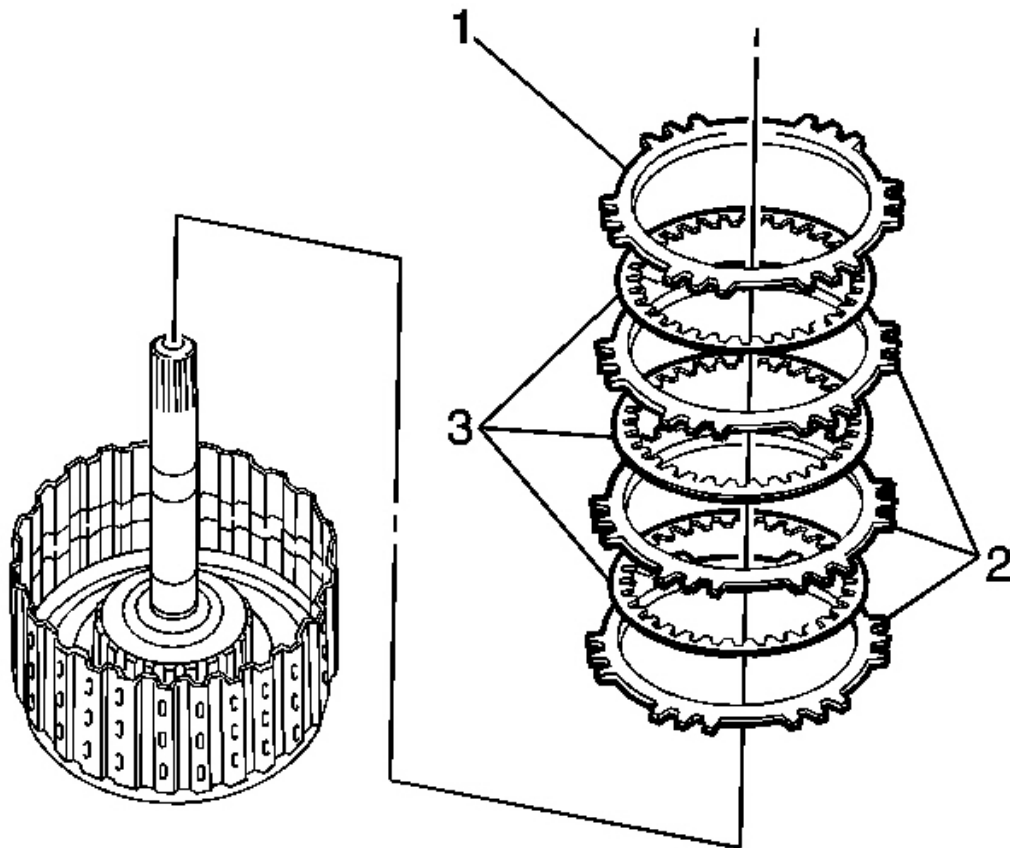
Flanges, Discs, Plate & Forward Clutch Drum
